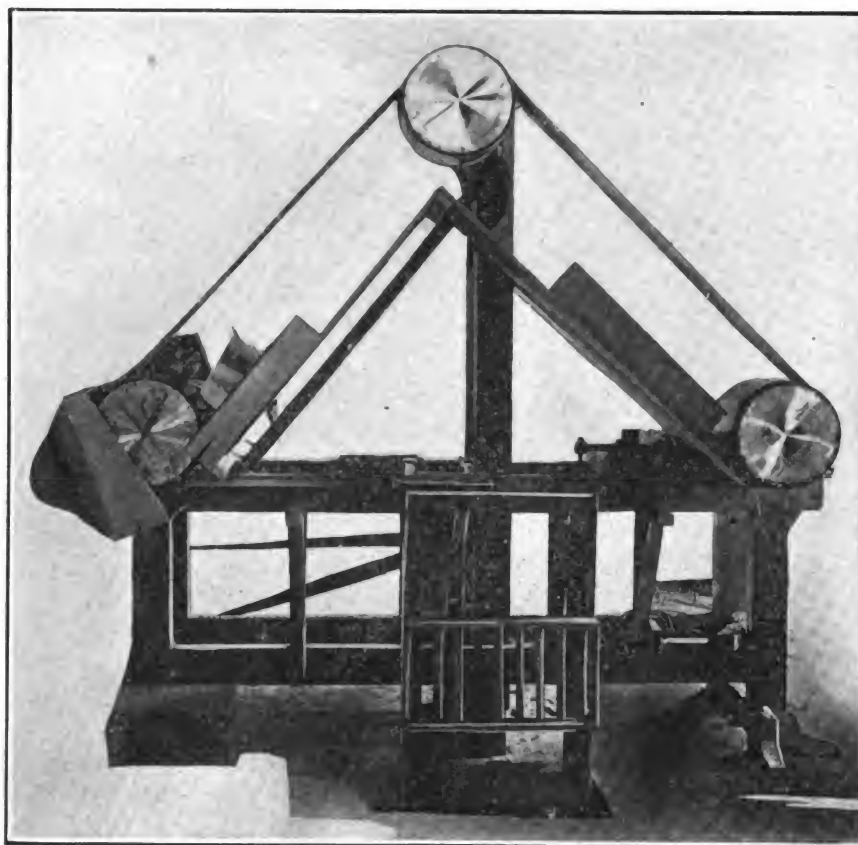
Sanding Machine for Buggy Bodies. Courtesy of Wood Craft.
